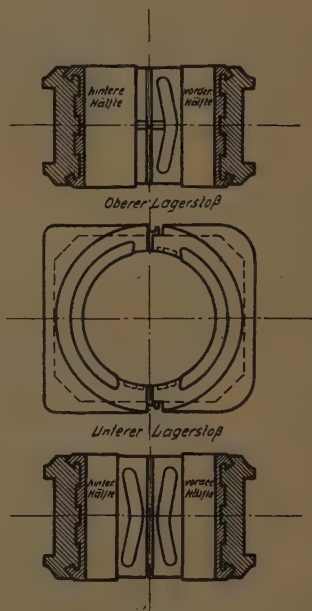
Arrangement of felt strip in rear driving rod bearing.
